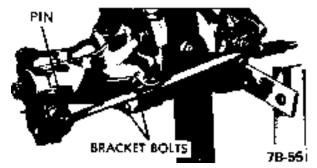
B-55 Pin and Bracket Securing Selector Lever to Intermediate Shaft and Bearing Retainer
